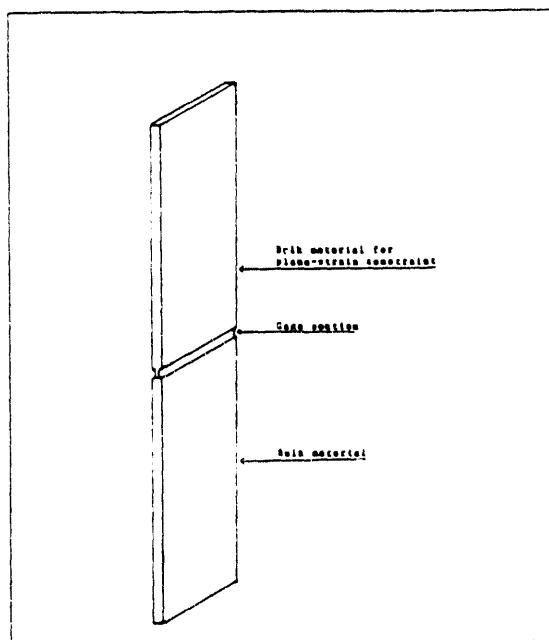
Perspective drawing of the plane-strain specimen geometry.
